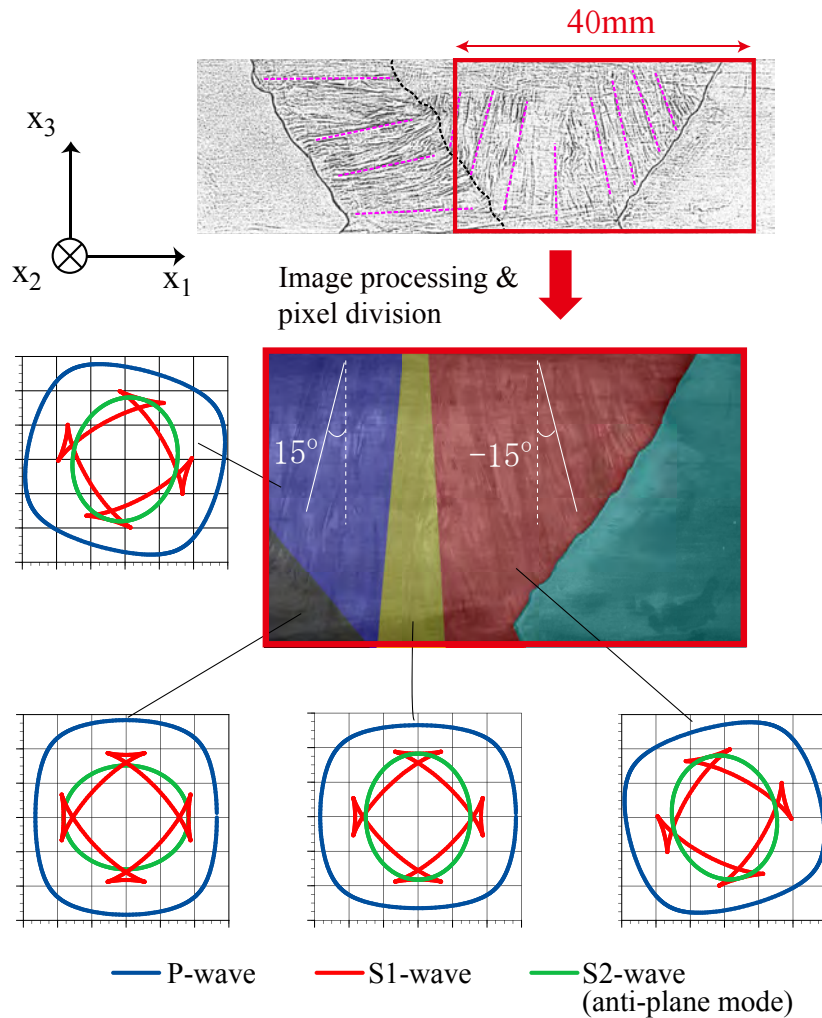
Image-based modeling of dissimilar metal welding part
